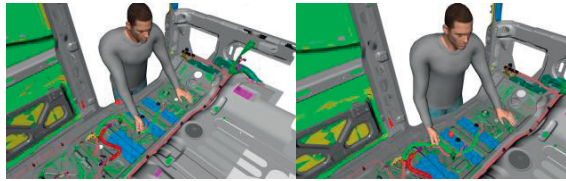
Two frames showing the assembly of the two cable clips. CAD models courtesy of Scania.
